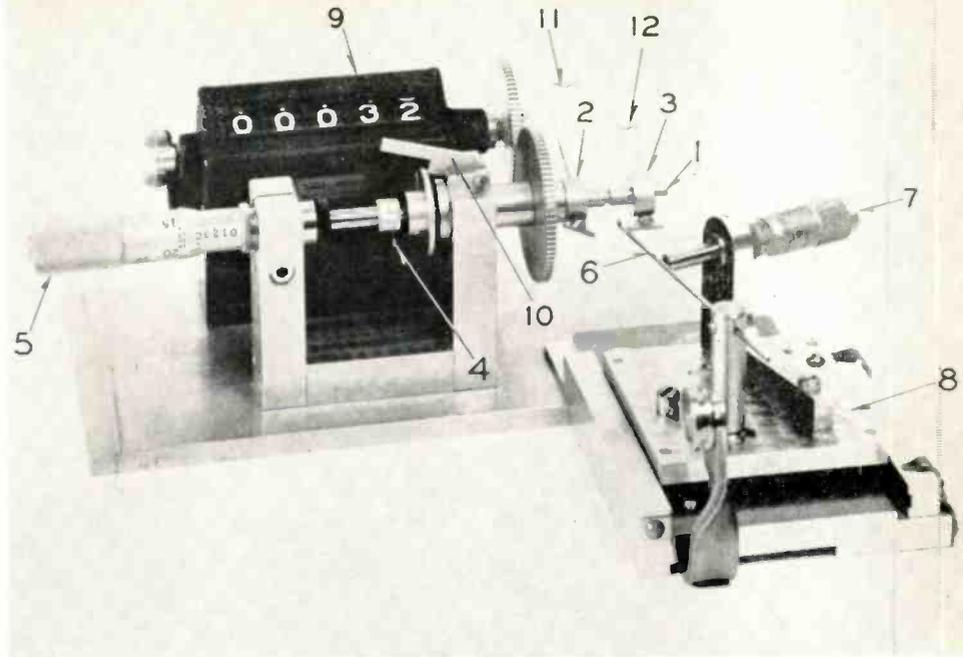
Principal parts of winding machine are: (1) arbor, (2 & 3) adjustable collars, (4) coupling between adjusting micrometer (5) and arbor, (6) wire guide, (7) micrometer to control guide, (8) movable platform for wire guide, (9) counter, (10) lock for arbor, (11 & 12) outriggers.
